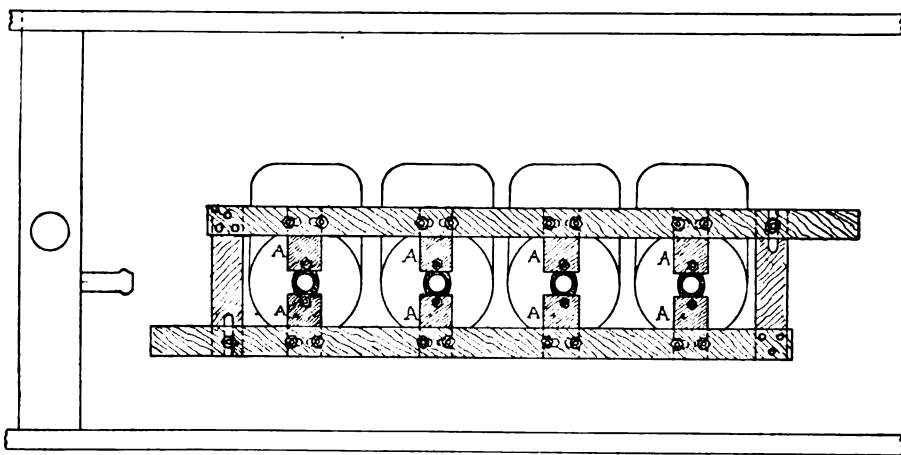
The next step is to bolt the wood side rails to the steel plates A, using two bolts to each plate. When this is properly done the template, as a whole, may be removed from the cylinder heads by loosening the clamping studs
